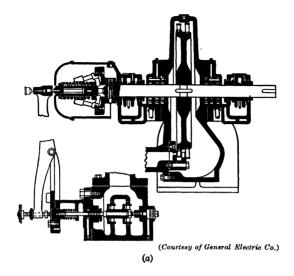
Mechanical-drive turbine with solid rotor carrying milled-out circular-blade passages. Velocity compounding is arranged by reversing the chambers adjacent to each nozzle (see Fig. 2-2d).
